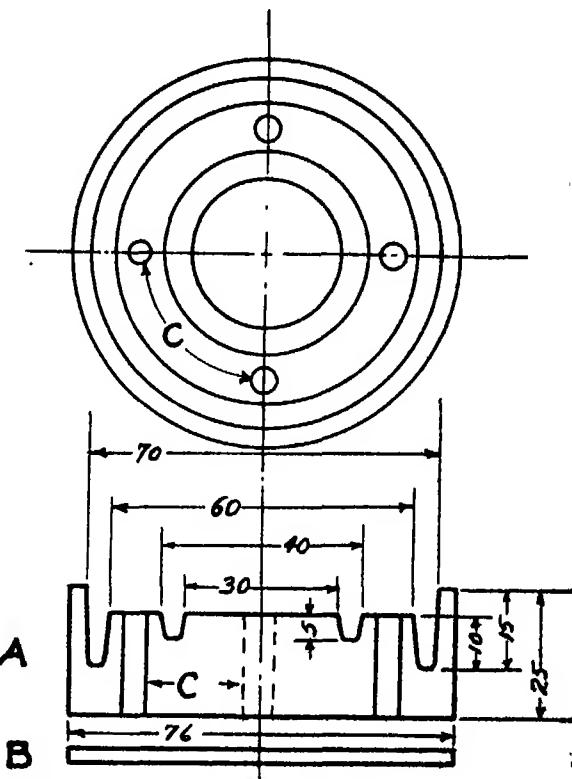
A. Cross-section of mold. B. Circular metal plate for support of rods in holes C. Dimensions in millimeters.
